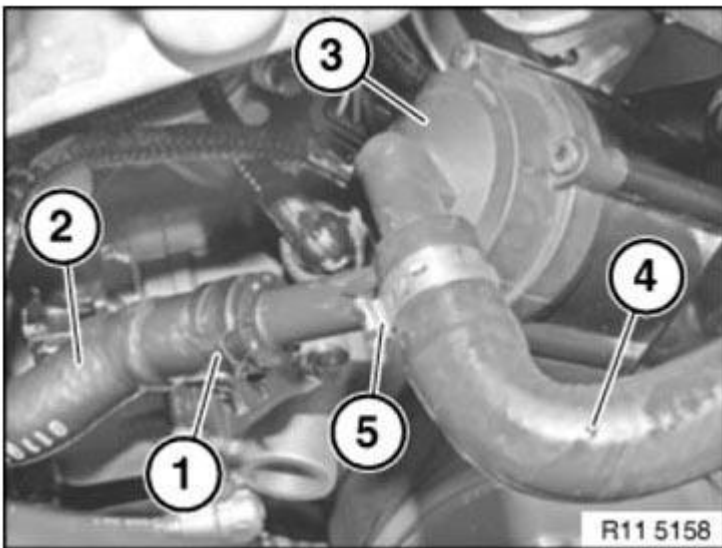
Identifying Auxiliary Water Pump, Coolant Hose And Hose Clamp
